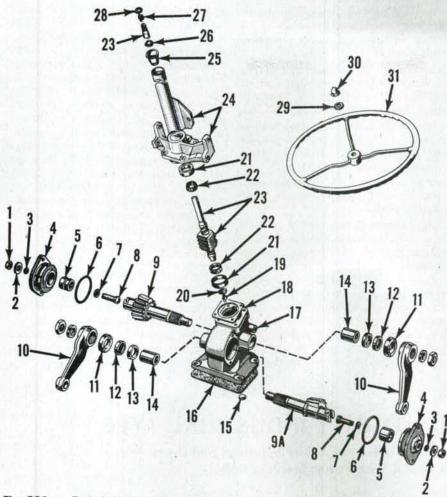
Exploded view of manual steering gear assembly used on All-Purpose and LCG tractors. Wormshaft bearing end play is adjusted by varying the thickness of the shim stack (18); shims are available in thicknesses of 0.002, 0.005, 0.010 and 0.030. Sector end play is adjusted with adjusting screws (8). Use thickness of shim (7) that will provide zero to 0.002 clearance of adjusting screw head in slot of sector gear (9 or 9A).
